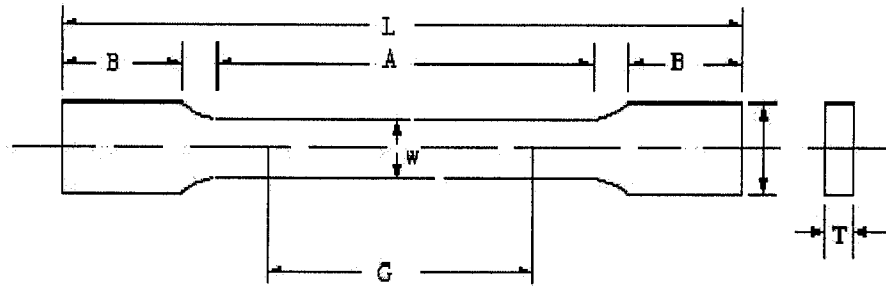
Schematic illustration of Tensile Test Specimen.
